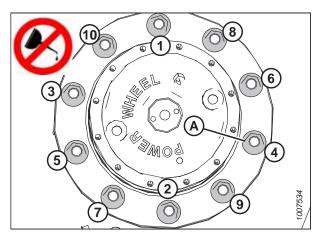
Drive Wheel – Nut Tightening Sequence
